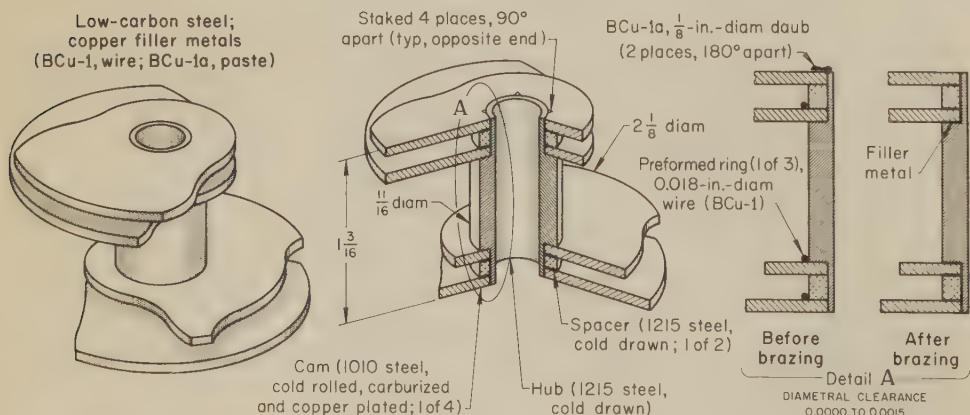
Multiple-cam assembly for which the method of self-jigging for brazing was changed from riveting to square staking to eliminate radial stress that caused warpage (Example 555)
